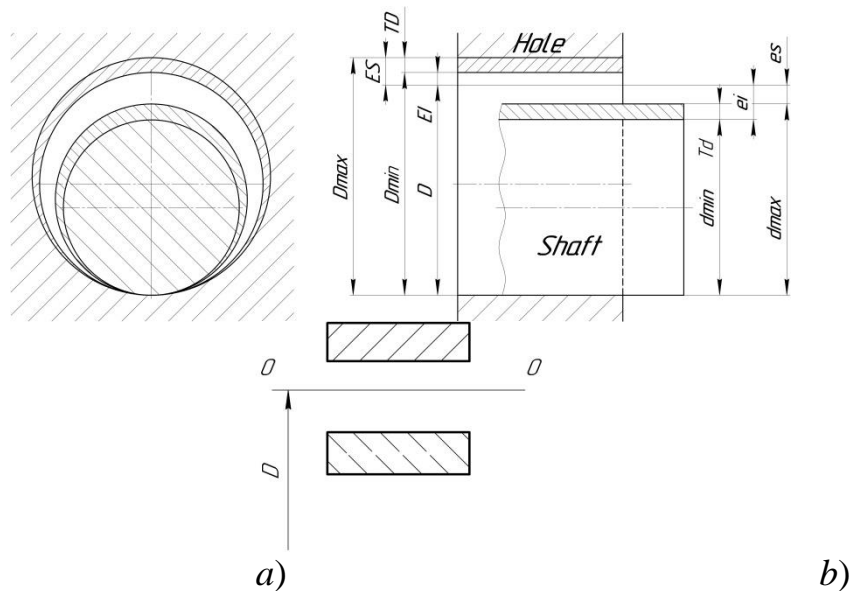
Is a layout of tolerance limits of holes and shafts
